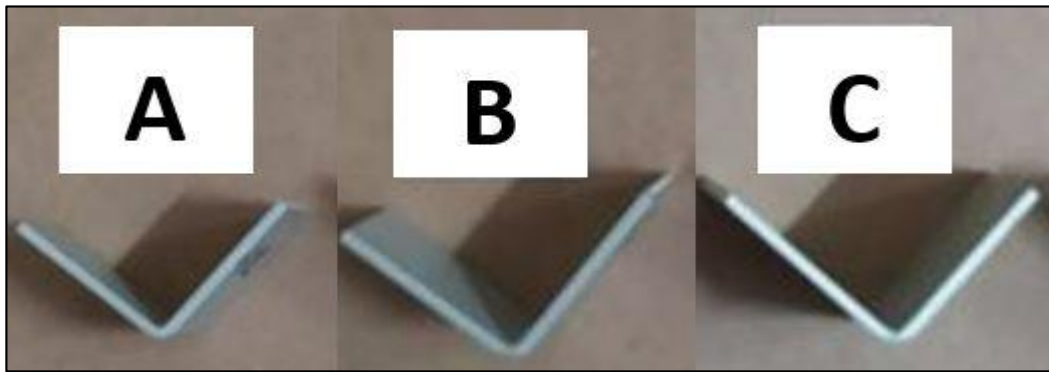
Aluminium alloy 6063-T5 V-bending test sample
